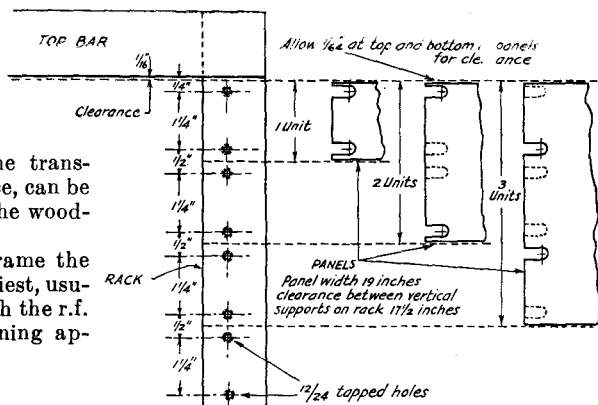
DRILLING AND PANEL DIMENSIONS OF THE STANDARD RELAY RACK
